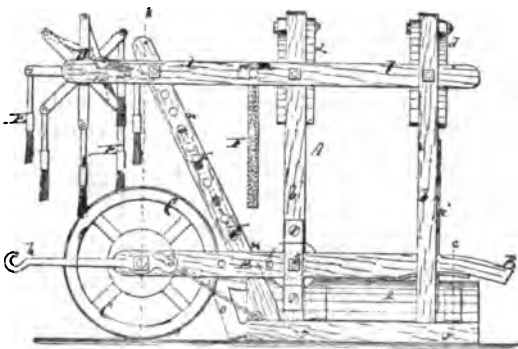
HELM BRUSHING-MACHINE: side view.
